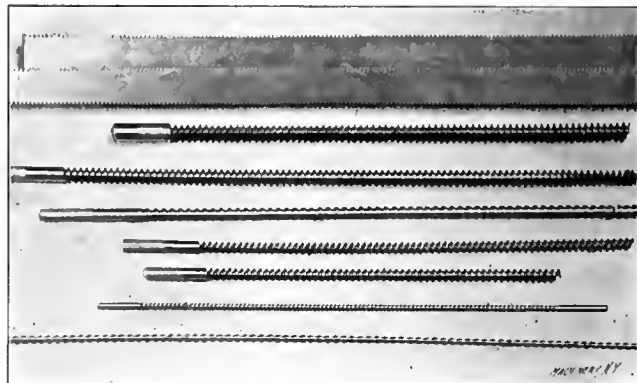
Method of Testing Accuracy of Pitch of Thread, and Examples of Threaded Work of Small Diameter.
